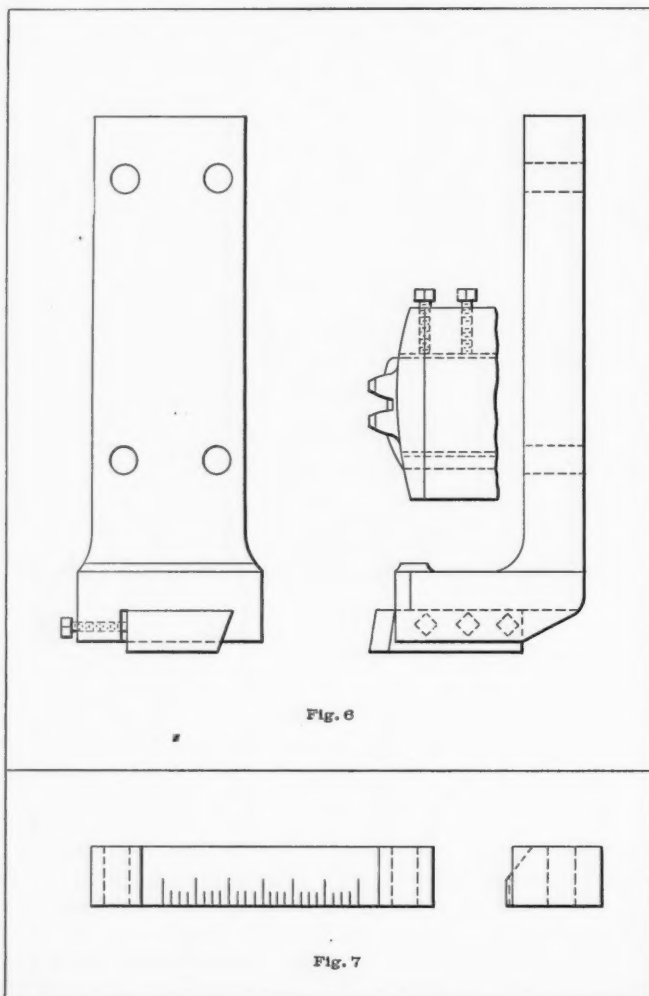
Tool and Holder for roughing out Teeth of Large Internal Gears
